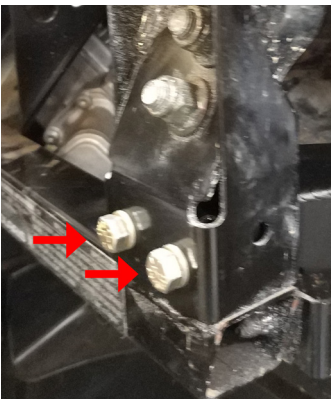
Striker Bracket Bolts - 1/2" Socket
